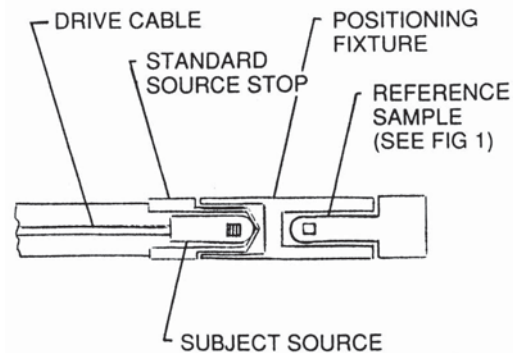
TYPICAL ARRANGEMENT USING A SPECIALLY DESIGNED GUIDE TUBE
